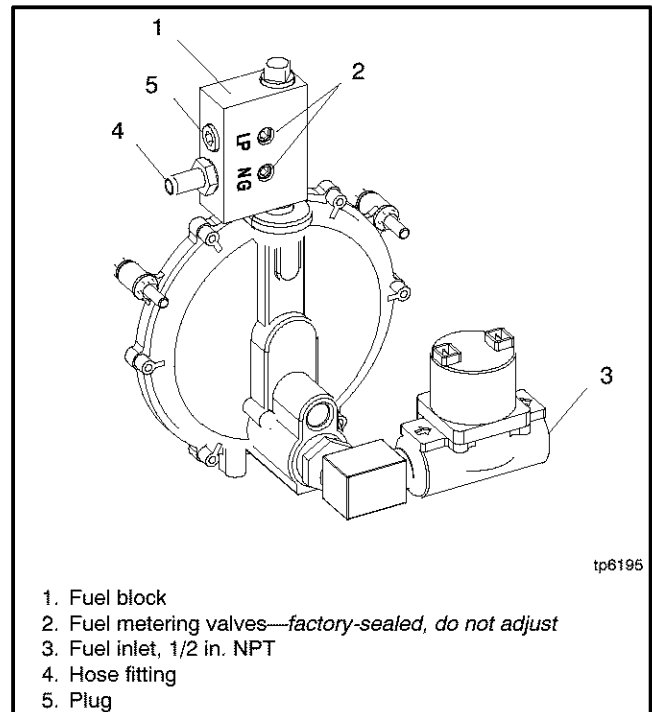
Fuel Block Connections, Natural Gas System Shown
